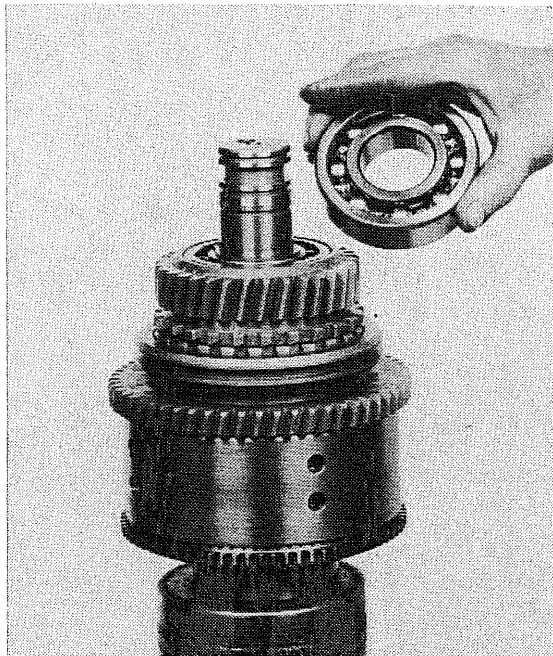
Assembly of the PFR Clutch (3 of 5)
